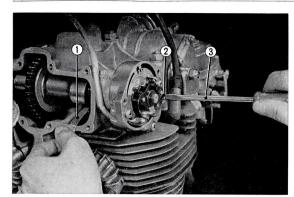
a ① Thickness gauge ③ Screw driver
